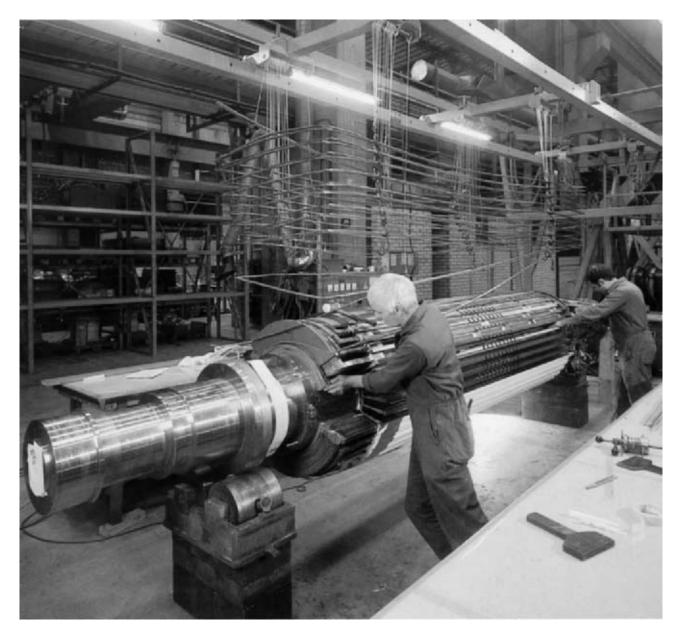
Assembling the rotor. (Source: Alstom.)
